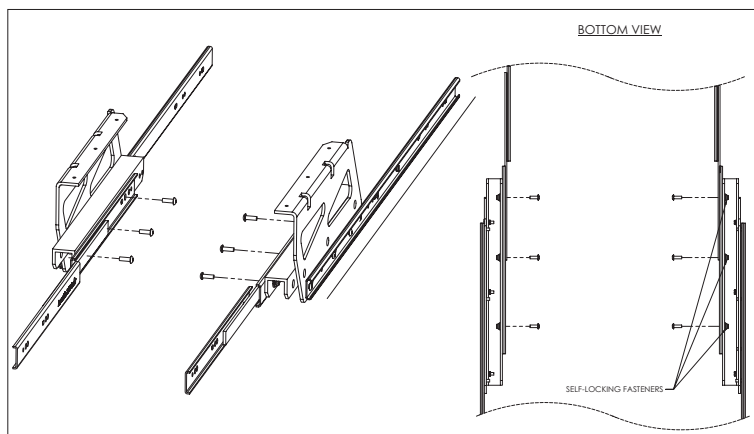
Figure B. Fully extend the keyboard slides to access the mounting holes for the self-locking fasteners.
